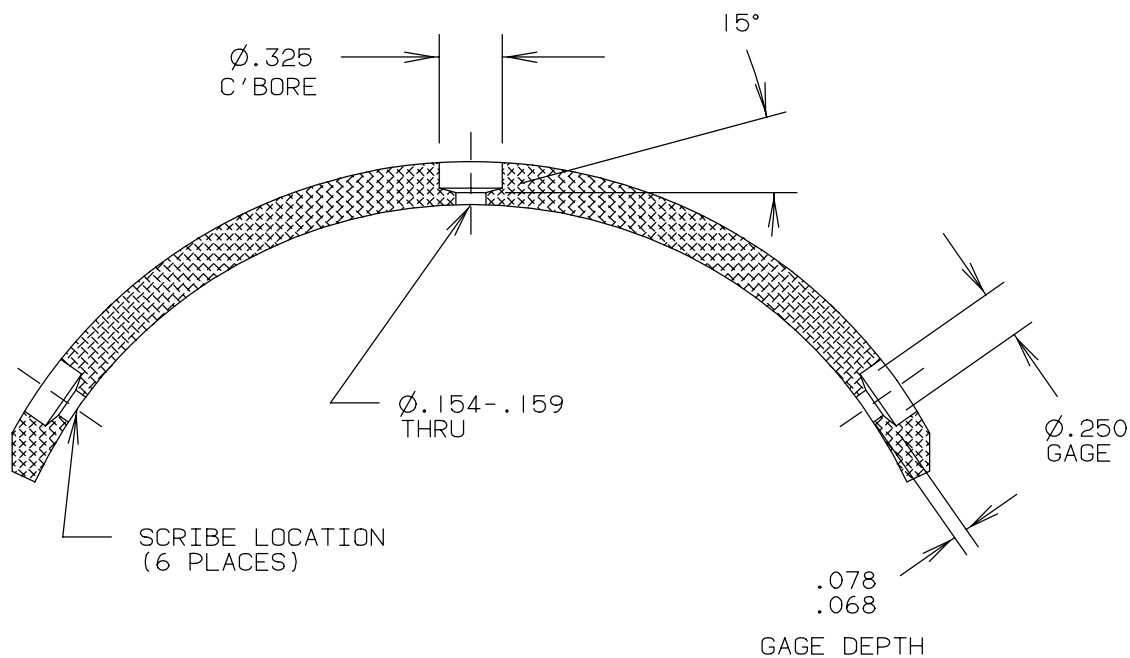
Installation of 066-00504 Lining to Brake Shoe
